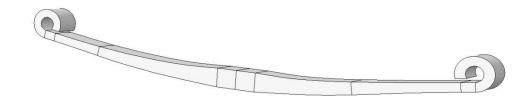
Schematic illustration of the leaf spring geometrical design, (Design B)
